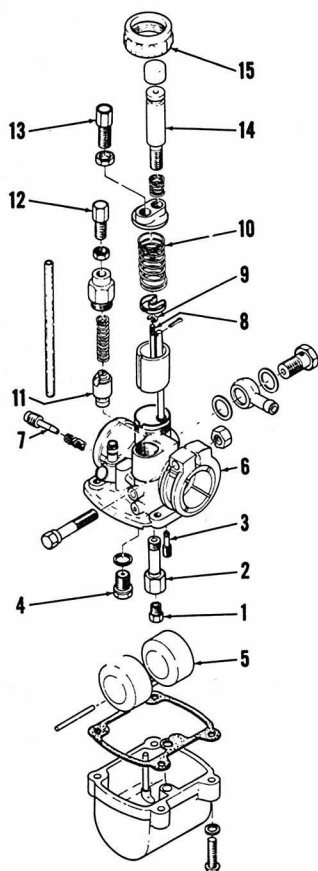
View of VM type carburetor used on G5 and G6 models.
